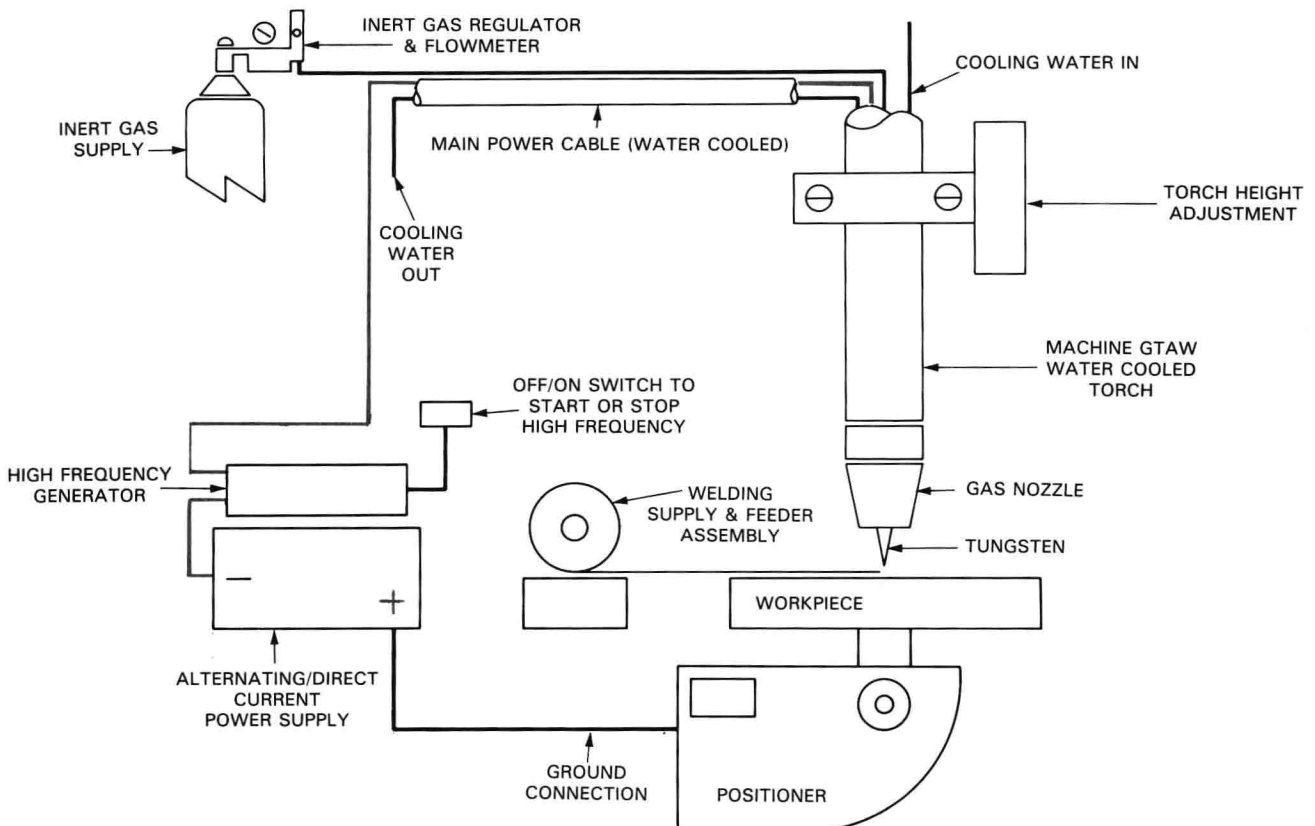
Positioners are used to locate and rotate circular parts at an accurate speed to allow for semiautomatic rotational welding.
